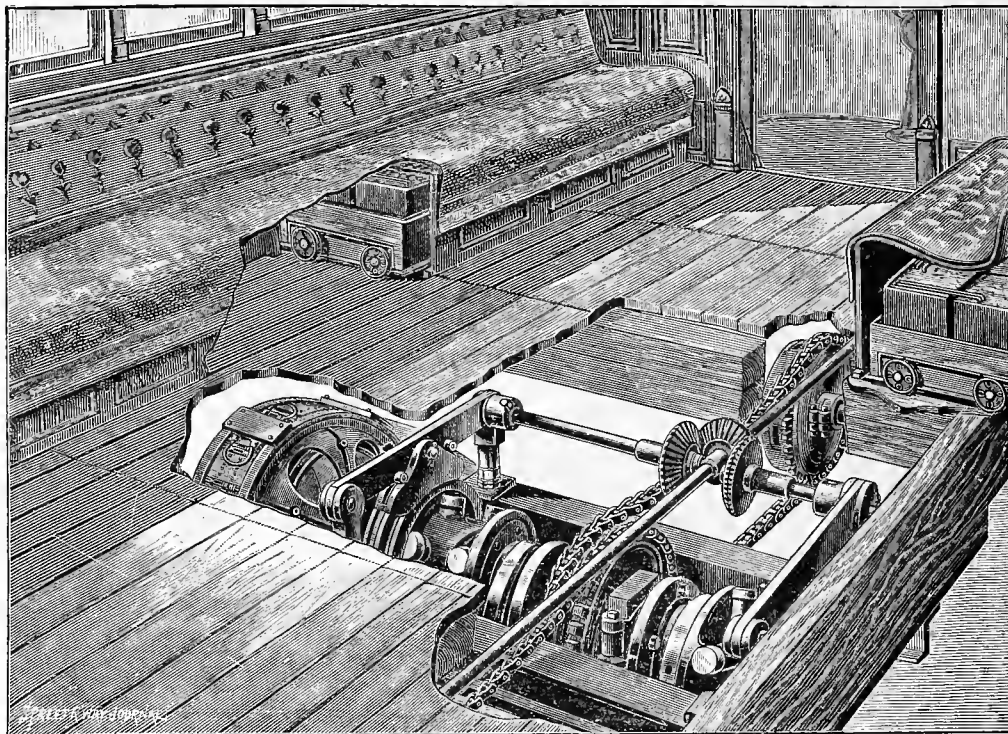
RIVER AND RAIL SYSTEM DRIVING MECHANISM.
